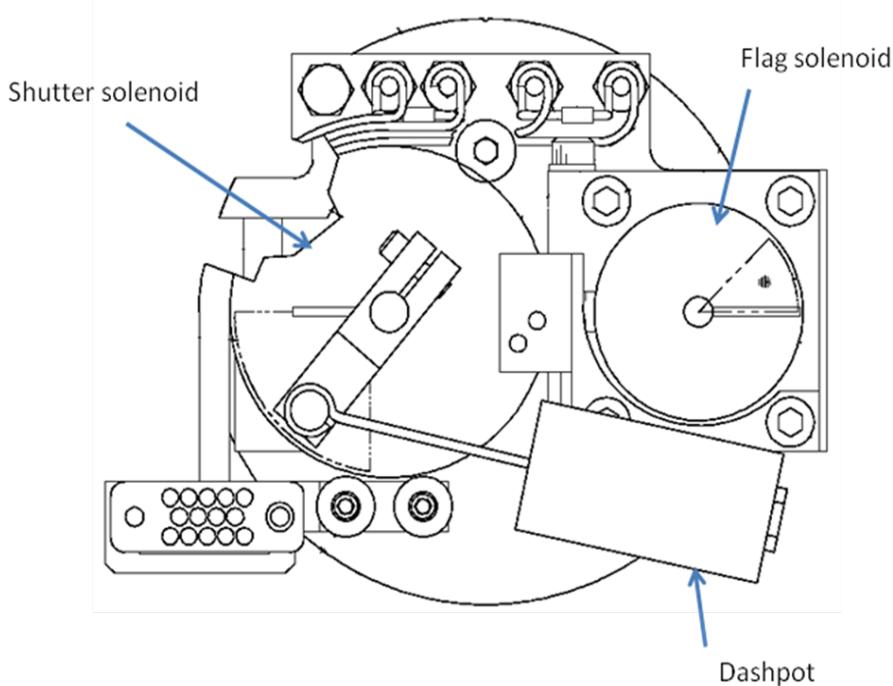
Top view of the Source 6 Assembly, showing two solenoids and dashpot
